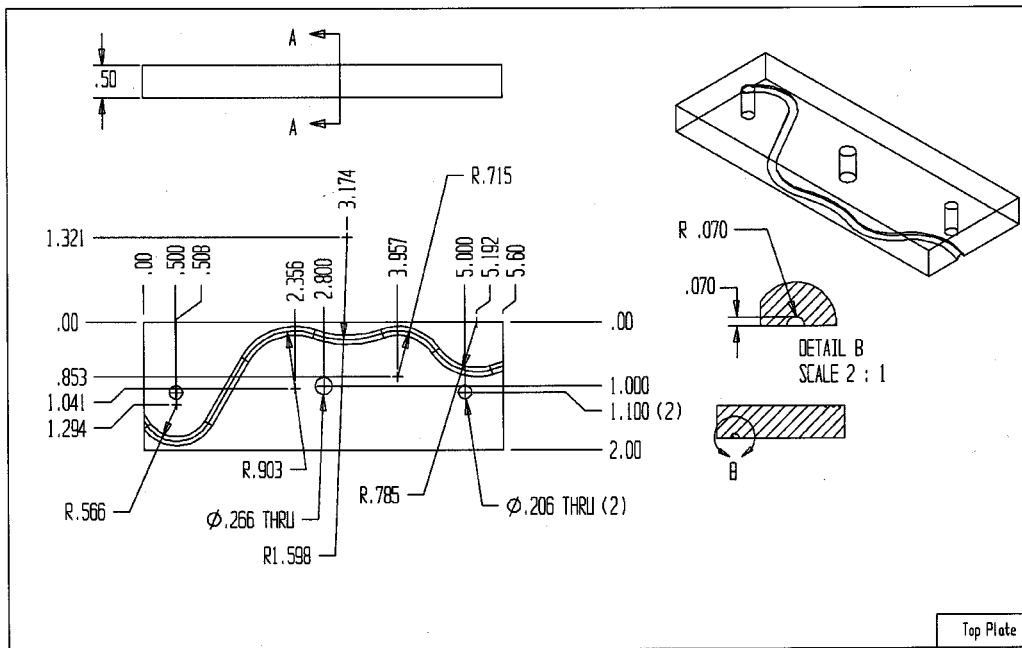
Top Plate of the Test Tracking Fixture for Conditioning the Stent, Balloon, and Stent Securement System
